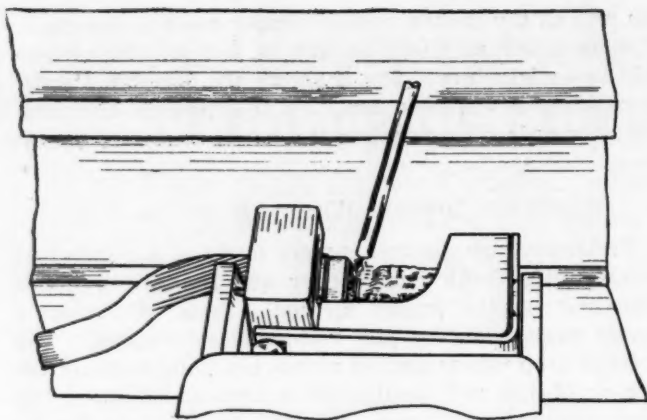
Welding Copper Wire to Deposited Metal
